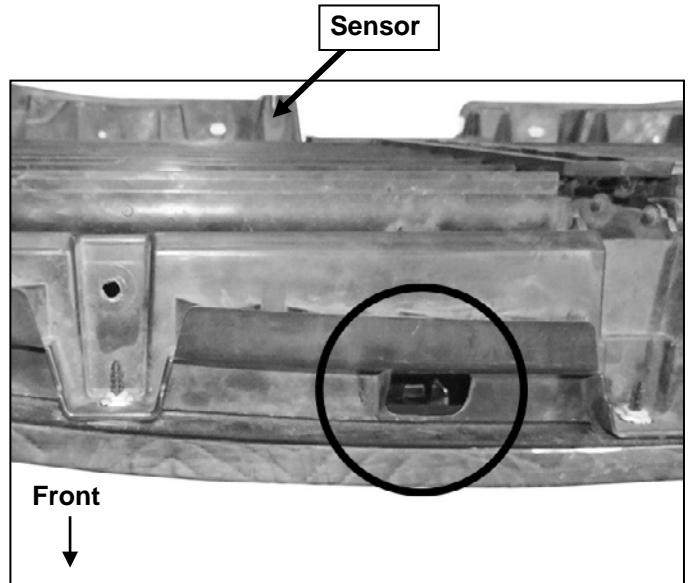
Attach Relocation Bracket and sensor to previously drilled holes. (2) Bolts are preferred, Bracket installed with (1) Bolt for example only
